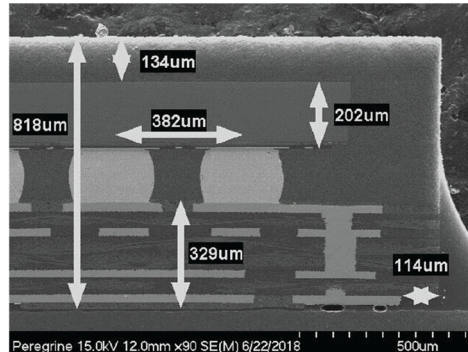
WLCSP Assembly Cross Section with Typical Dimensions
